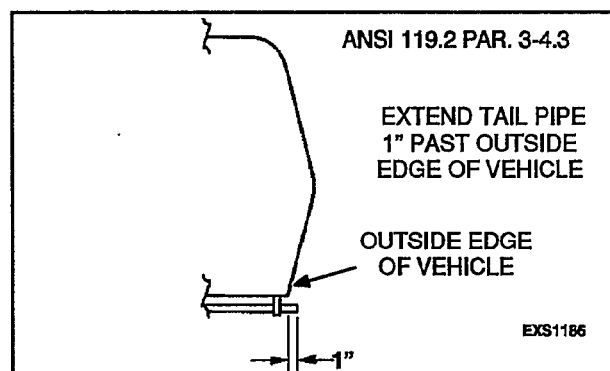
TAIL PIPE EXTENSION BEYOND VEHICLE
